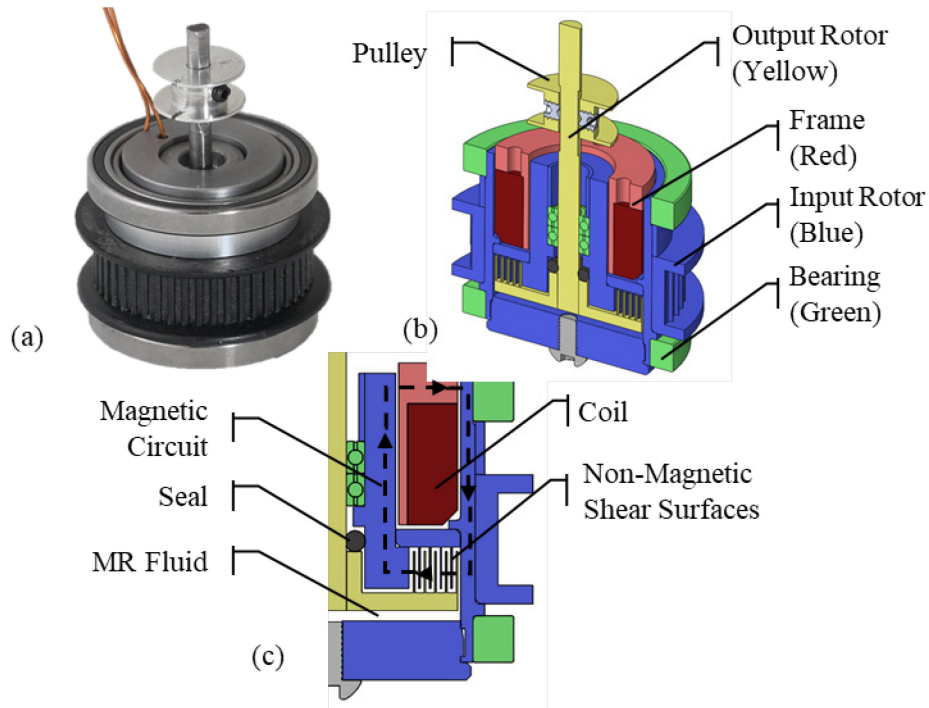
(a) Photograph of the Miniature MR Clutch Used in the Haptic Glove. (b) Cross-Section View of Computer-Assisted Drawing of the MR Clutch (c) Magnetic Circuit View
